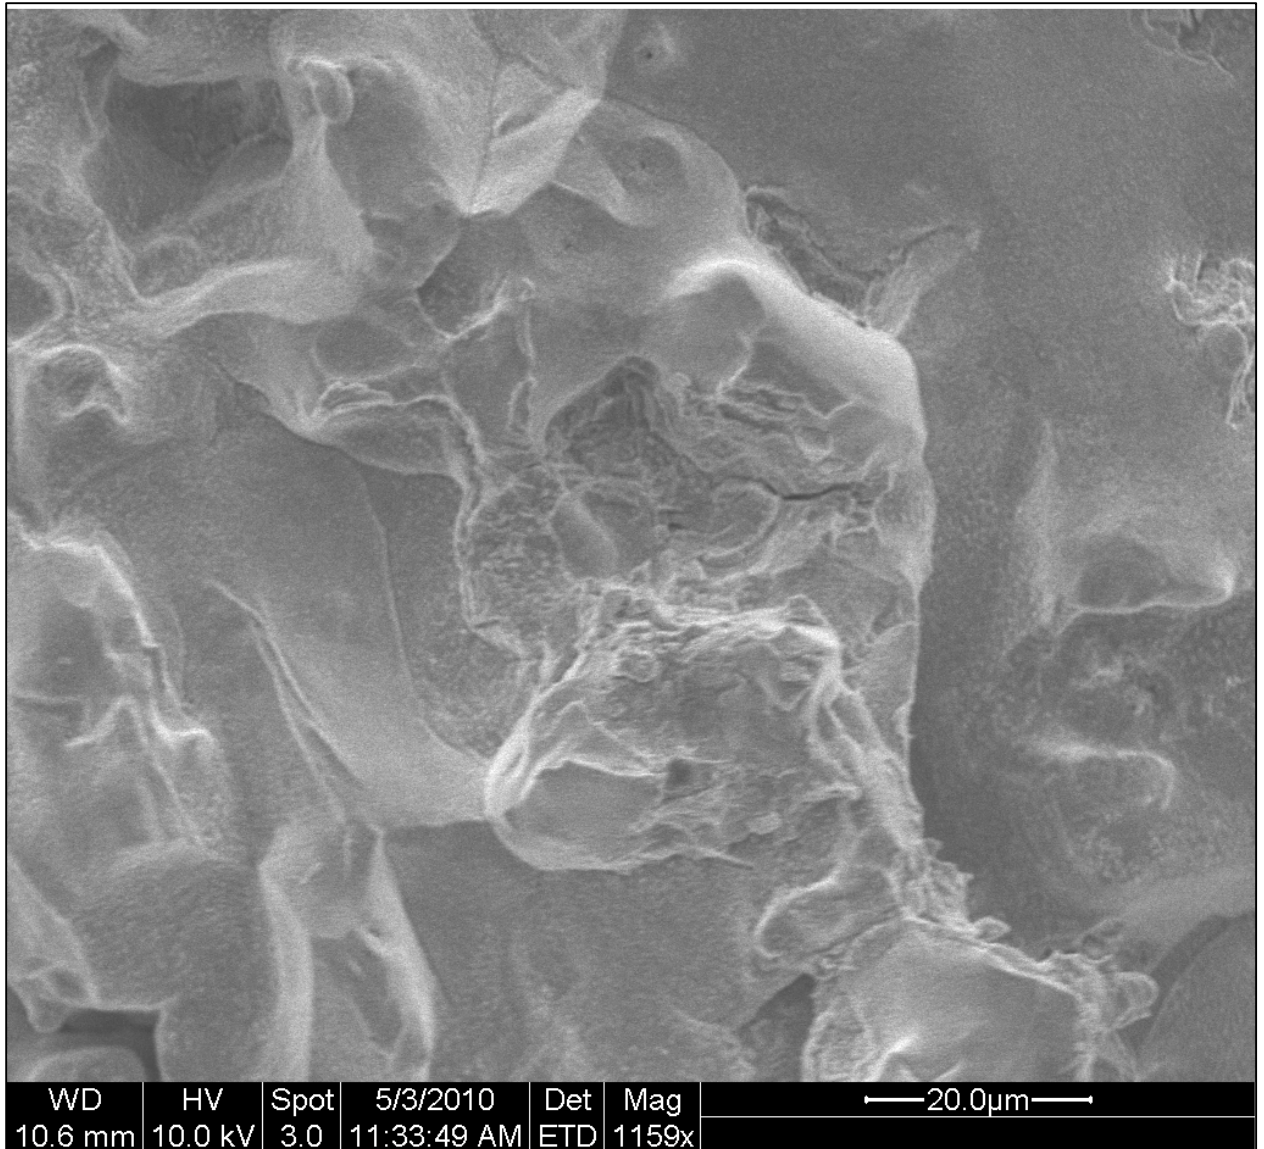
Haynes 230 on-cooling 2153 °F fracture surface. The more textured surface at the image center indicates localized plastic deformation resulting from the failure process.
